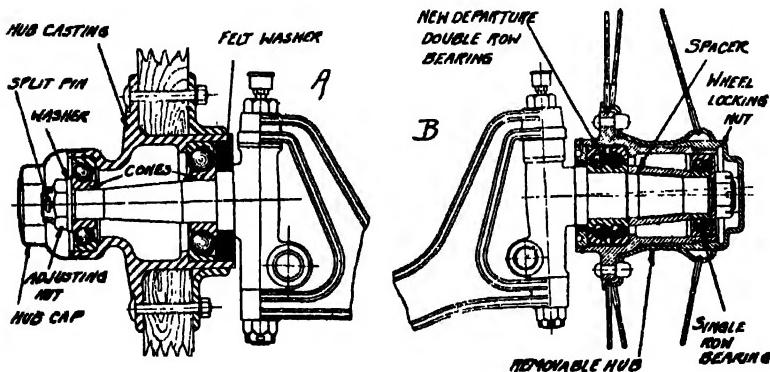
Illustrating Two Methods of Mounting Front Wheel Hubs on Ball Bearings. A—Cup and Cone Bearing. B—Unit Type Non-Adjustable Bearings.
